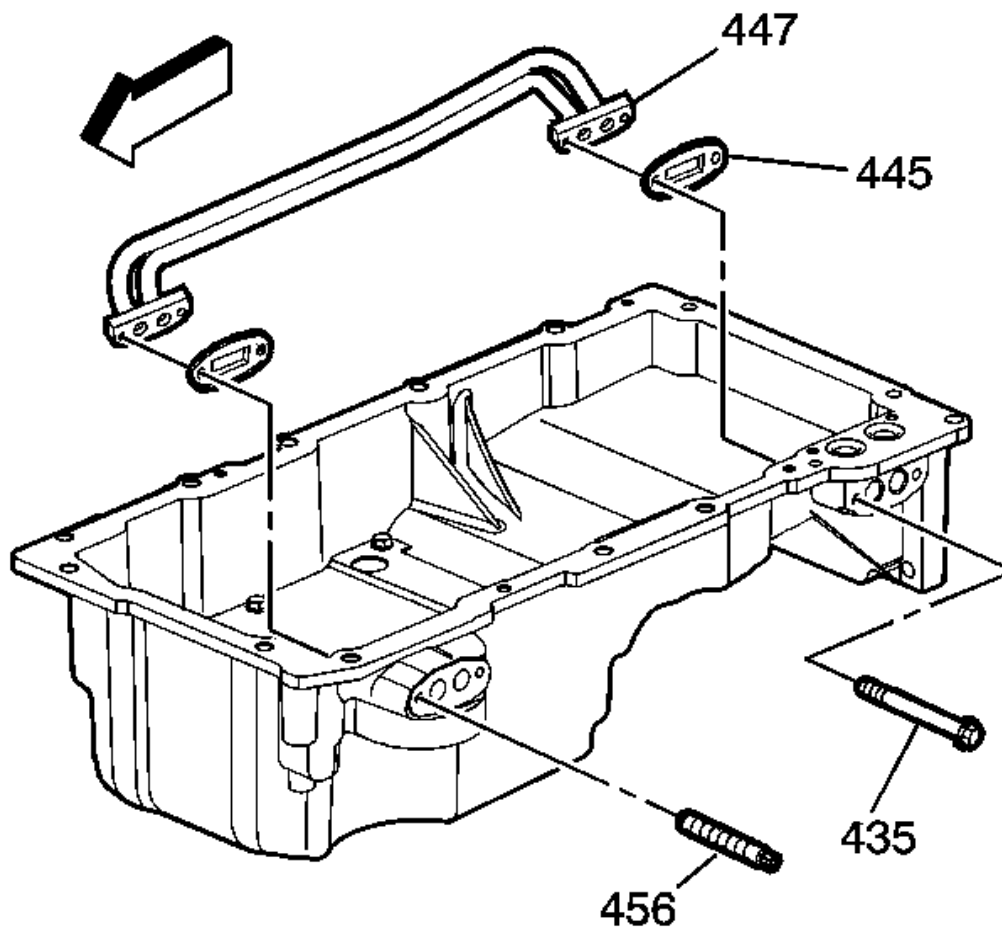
View Of Oil Transfer Tube, Bolts, Studs & Gaskets
